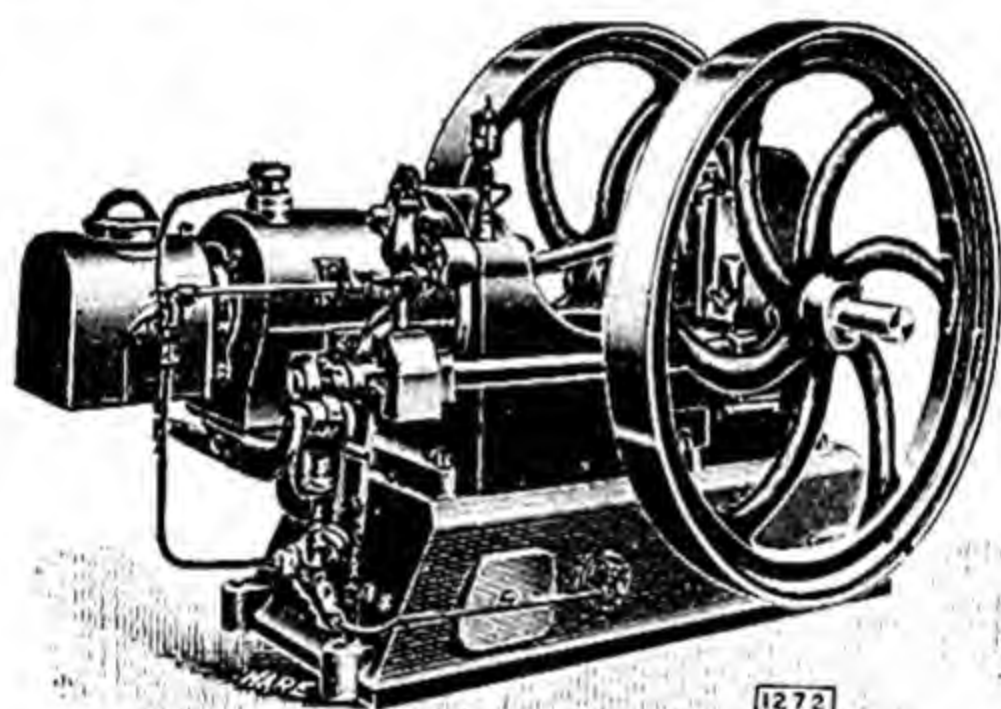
External view of the Hornsby-Akroyd oil engine.
